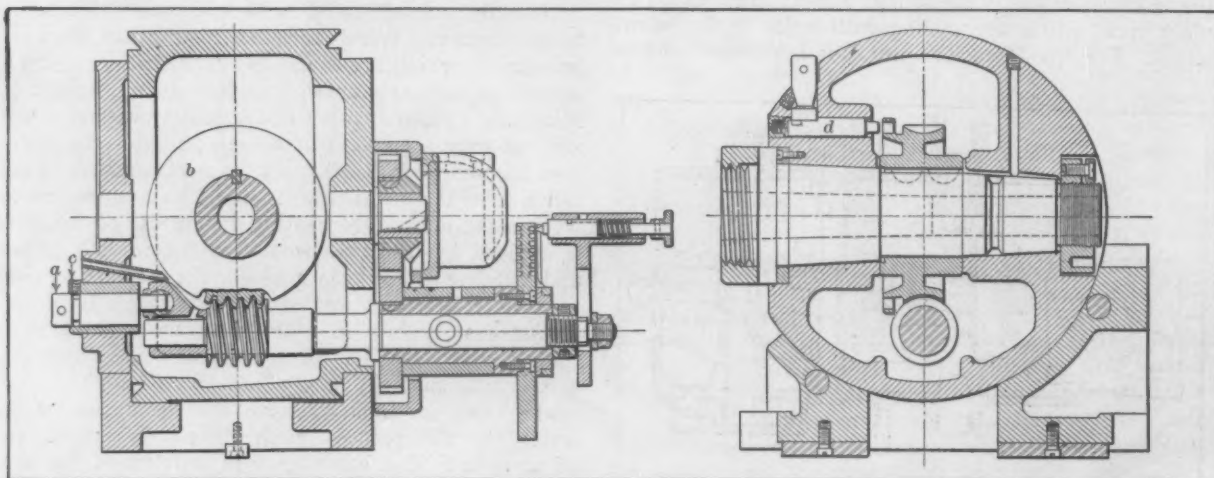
Sectional Elevations of the Universal Dividing Head.
